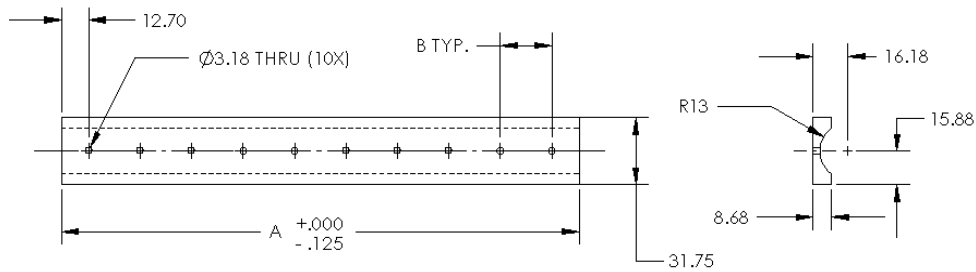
Machining Drawing for Lower Blocks, with Dimensions in millimeters
